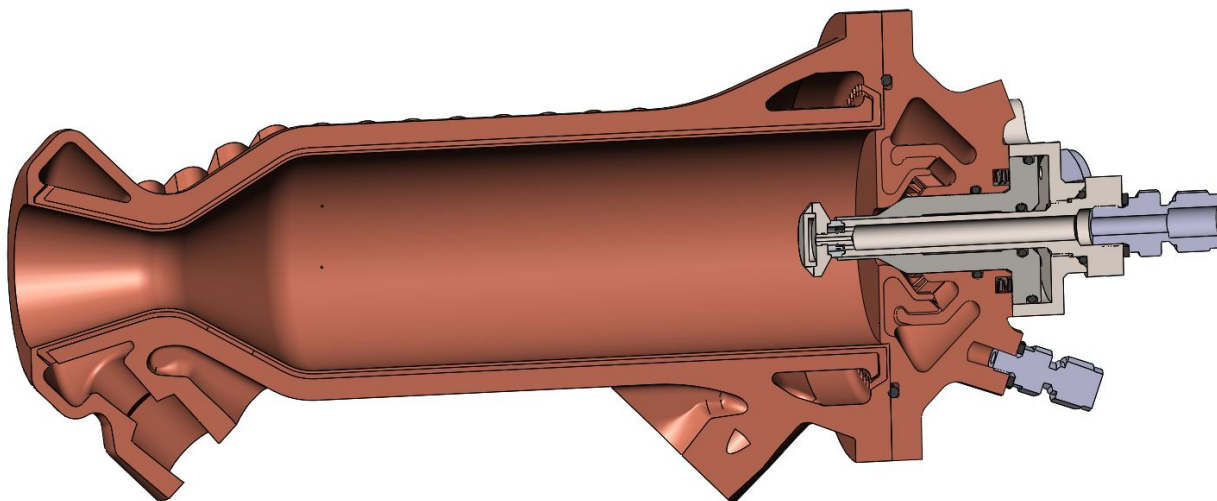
The additively manufactured chamber and injector, in a cross section view with the conventionally machined pintle injector components. The pintle injector has a sleeve that can move axially to close off both the fuel and oxidiser injector orifices to throttle the flow. The coolant enters from a boss at the nozzle end and leaves from a boss at the injector end.
